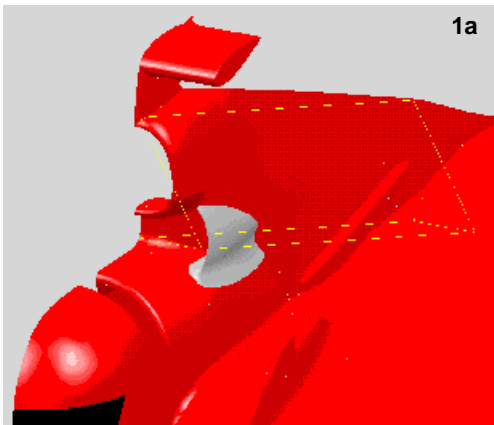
Isometric view of a wireframe rendition of the tobleron
